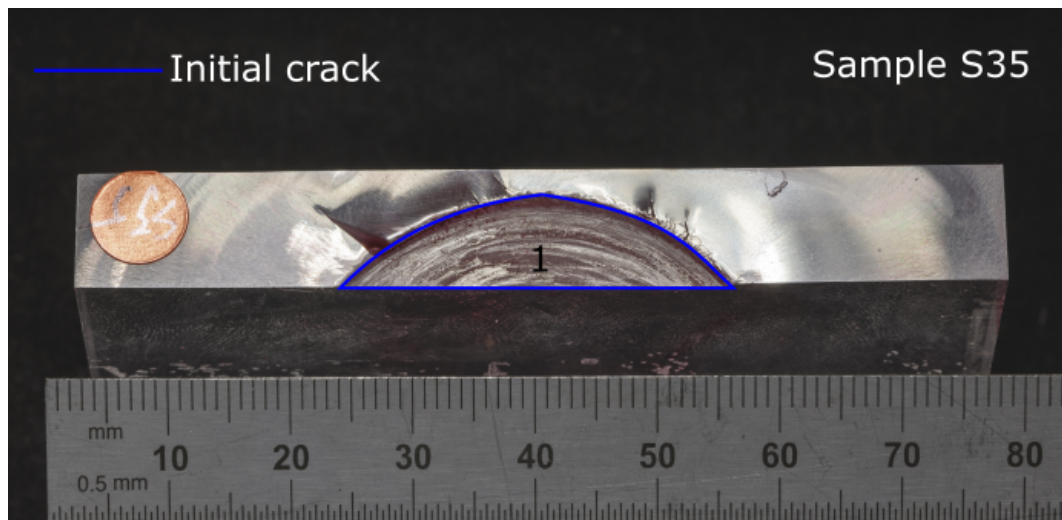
Test on Perspex plate - Fracture surface - Sample S35
